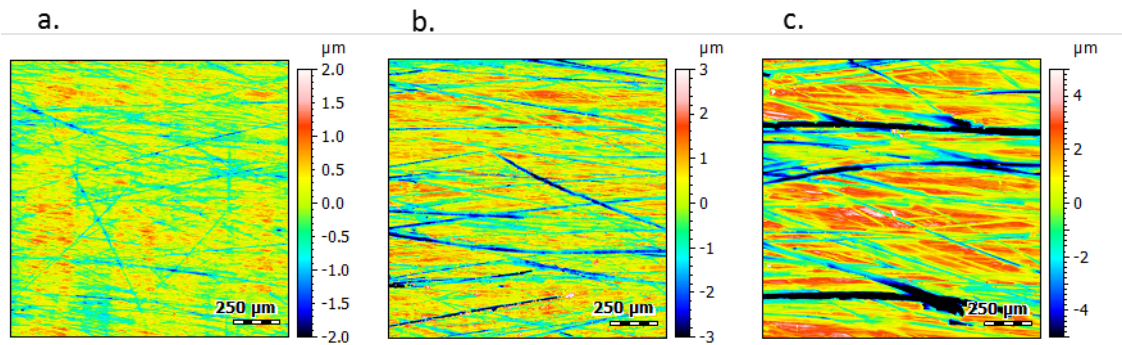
Confocal measurement tool surface a. Tool 1 b. Tool 2 and c. Tool 3.
